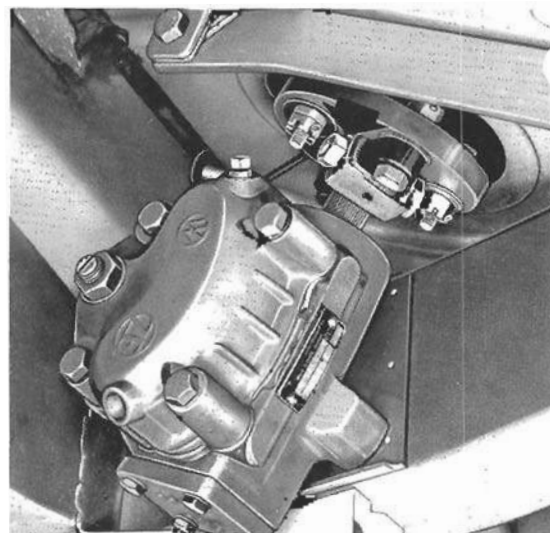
Clamp bolt (arrow) that holds steering coupling flange or worm spindle.
